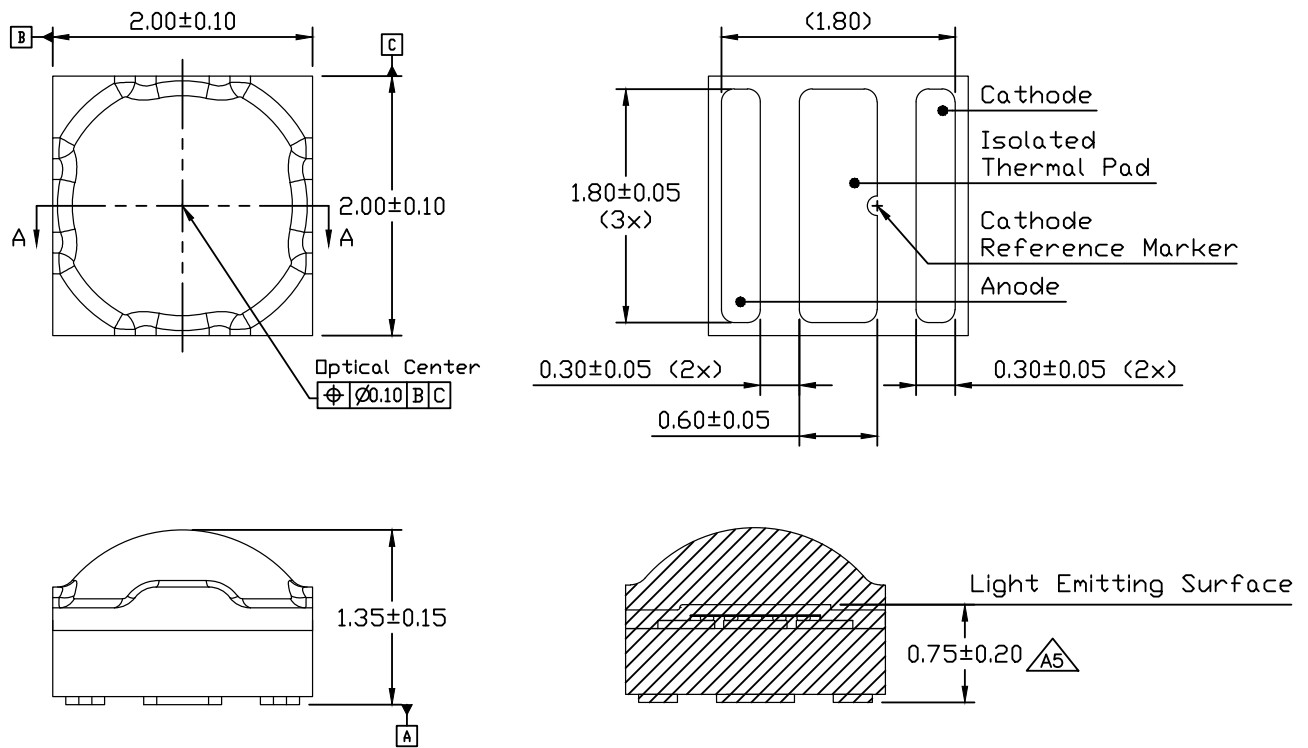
Mechanical dimensions for LUXEON C Color Line.
